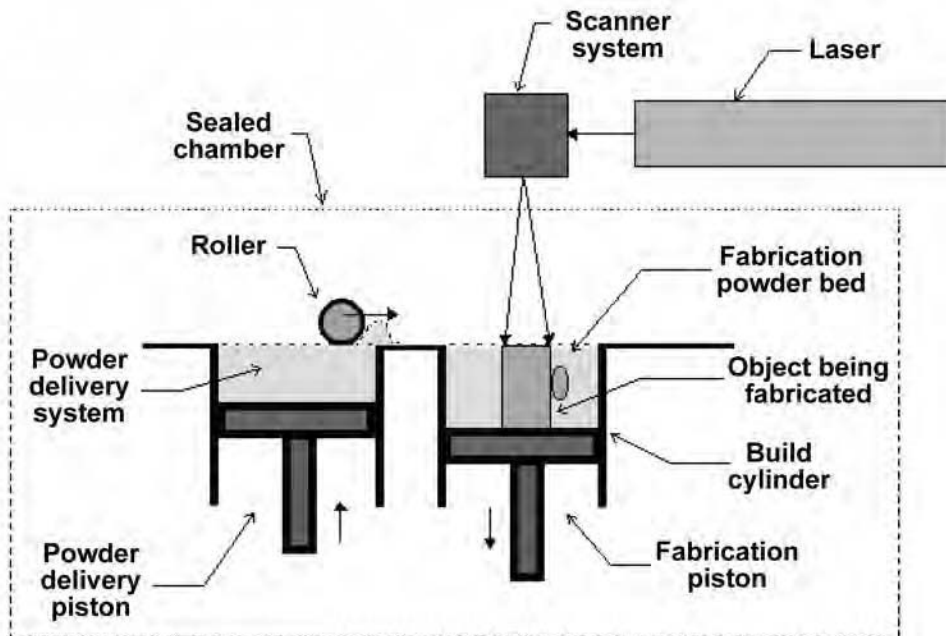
Selective laser sintering. Courtesy of Castle Island Co.
